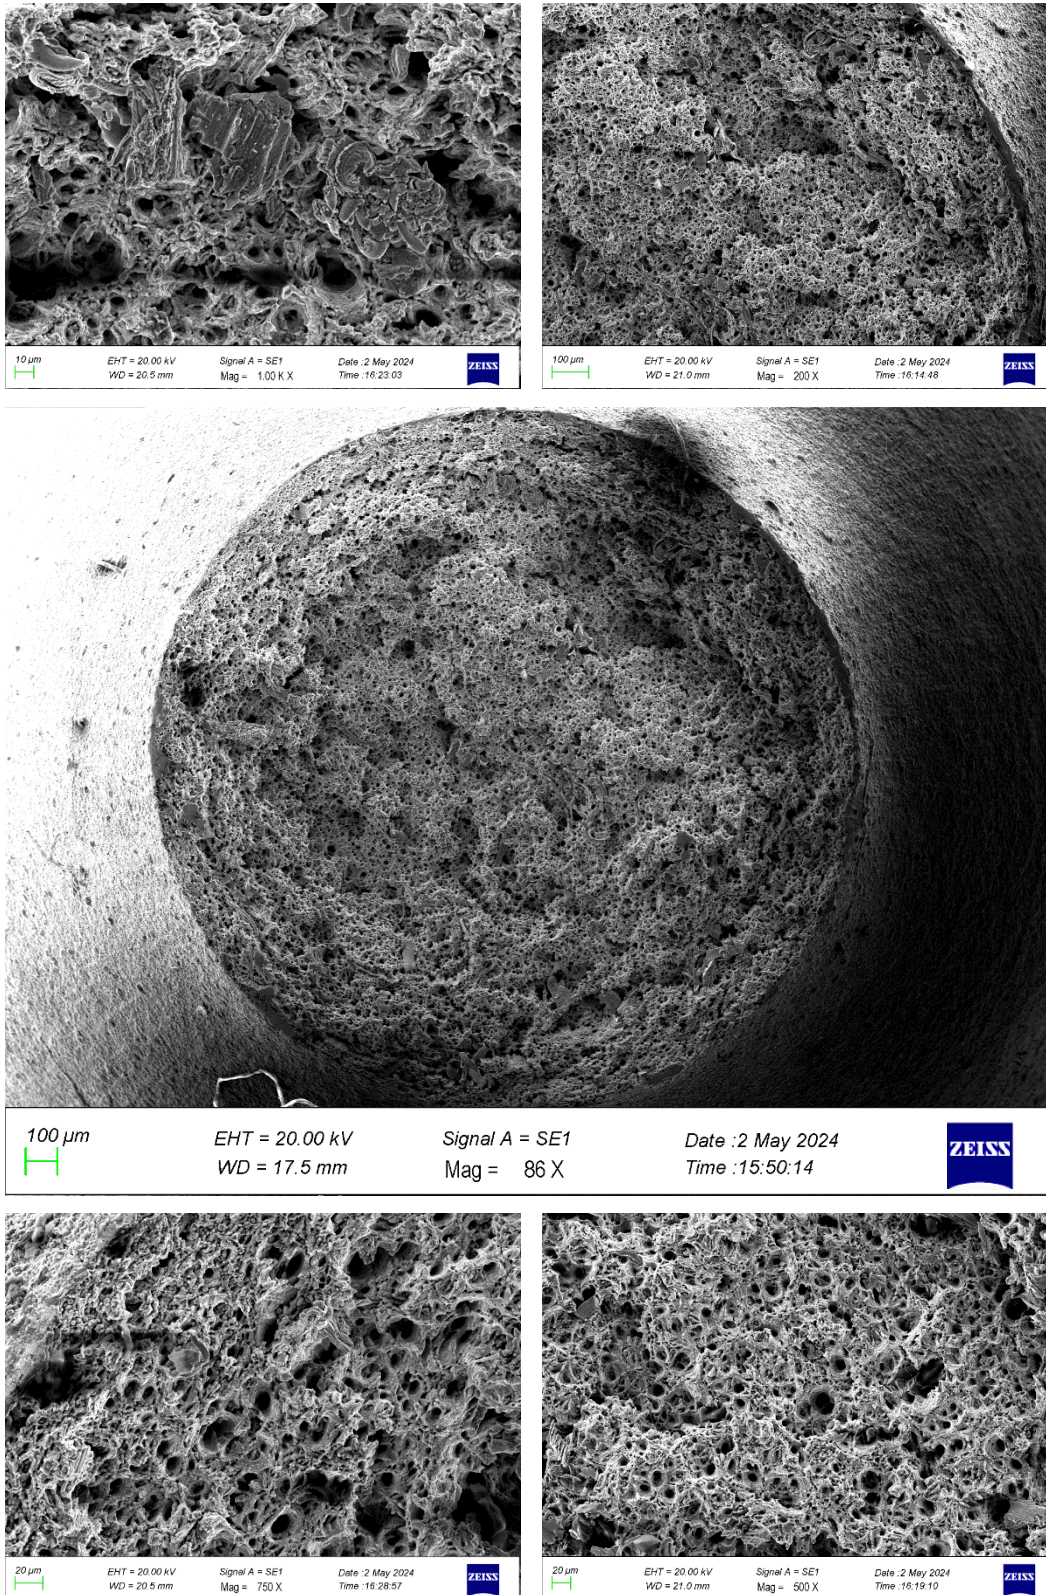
Fracture morphology under SEM after hot tensile test at 1050°C
